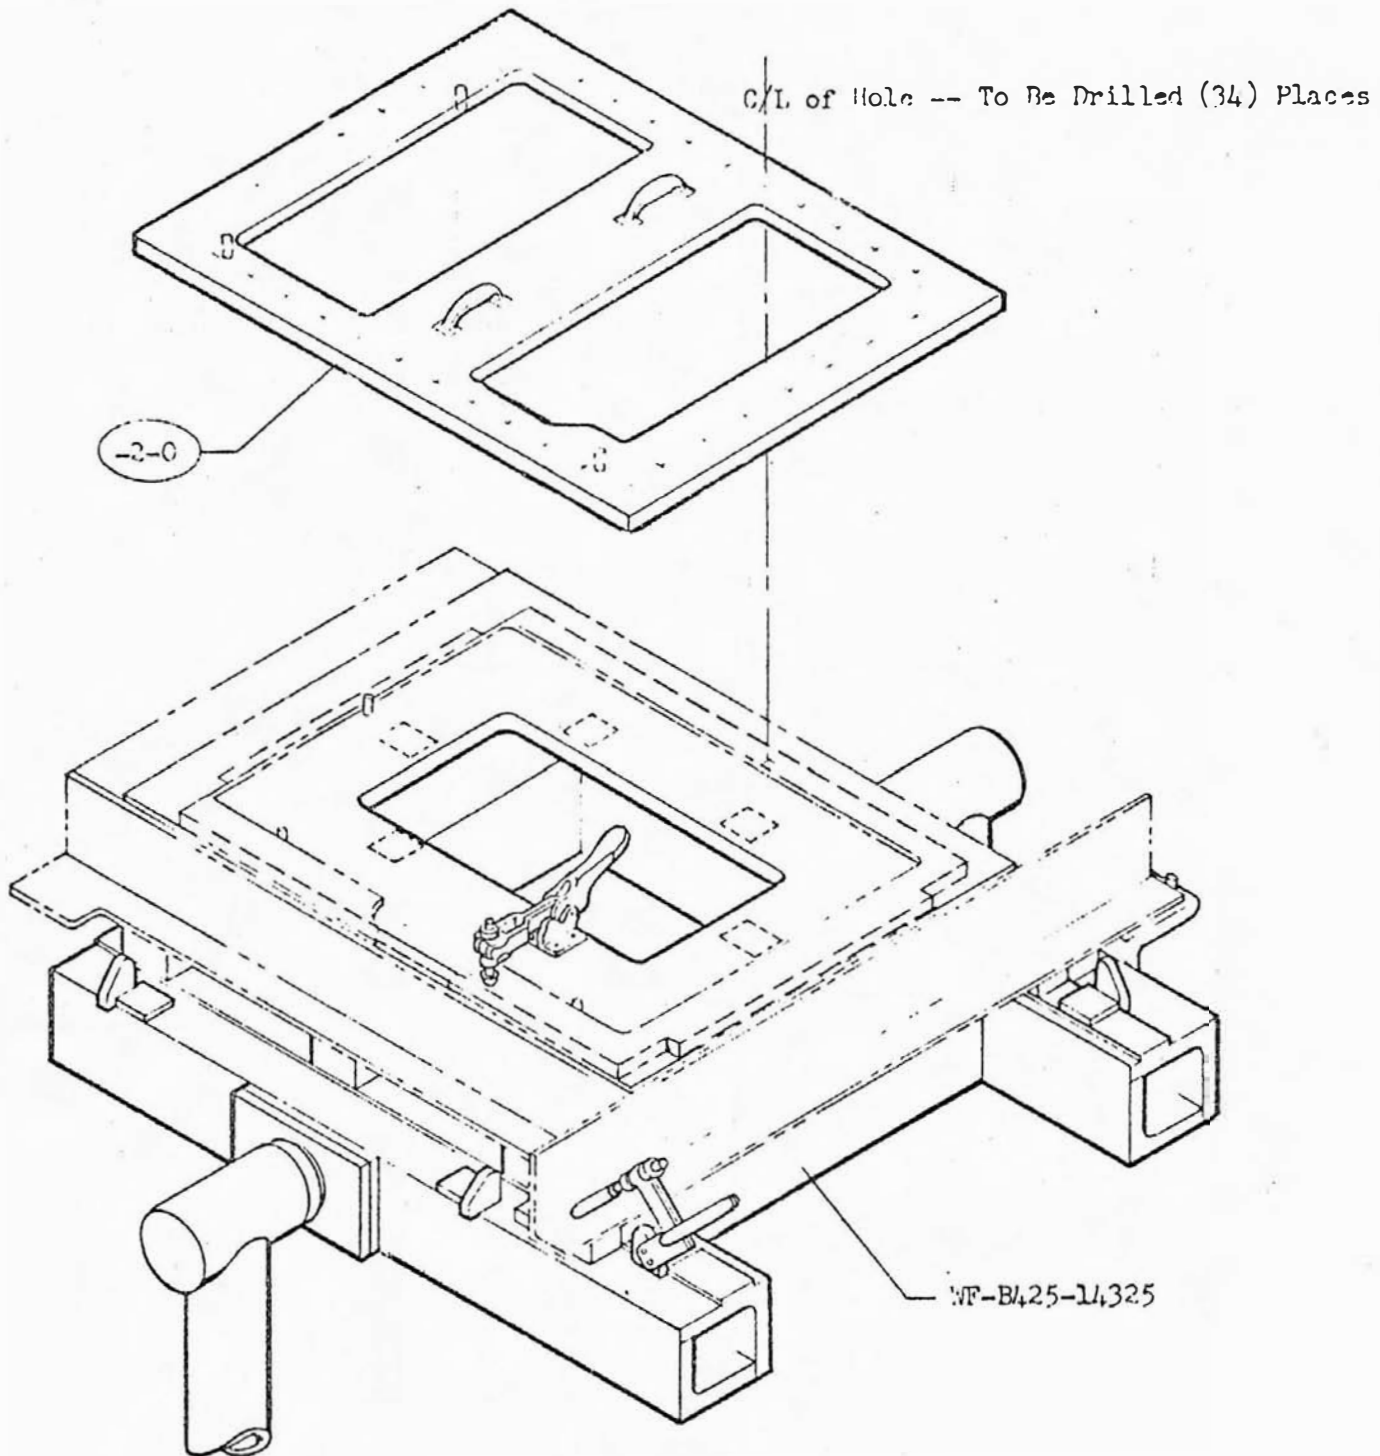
Umbilical Frame Weldment Weld Fixture
